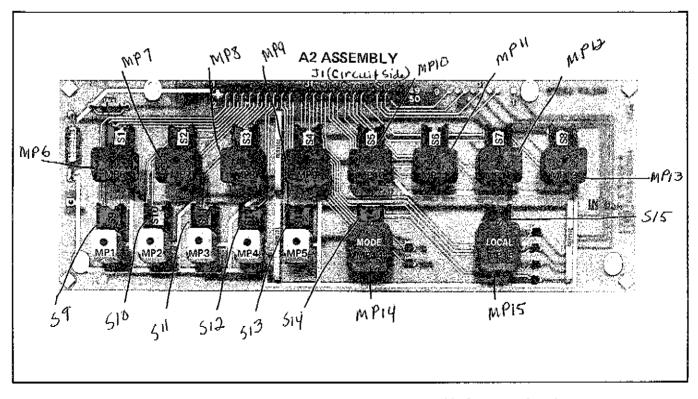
Front Panel Key and Display Board Assembly Component Locations
